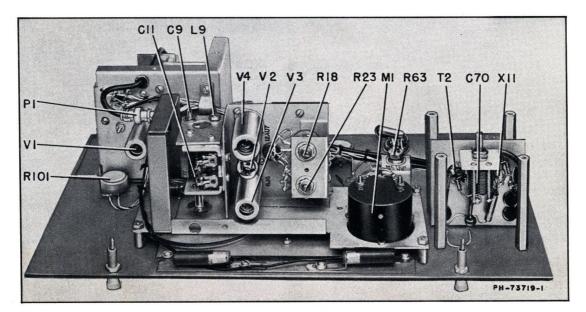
Panel, Rear Mounted Units, Shields Removed, Top View
